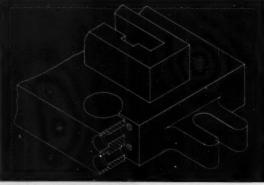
Diagram of die-shoe having a clearance slot between the leader-pin hole and the pin. Clamping is achieved by socket head cap-screws.
